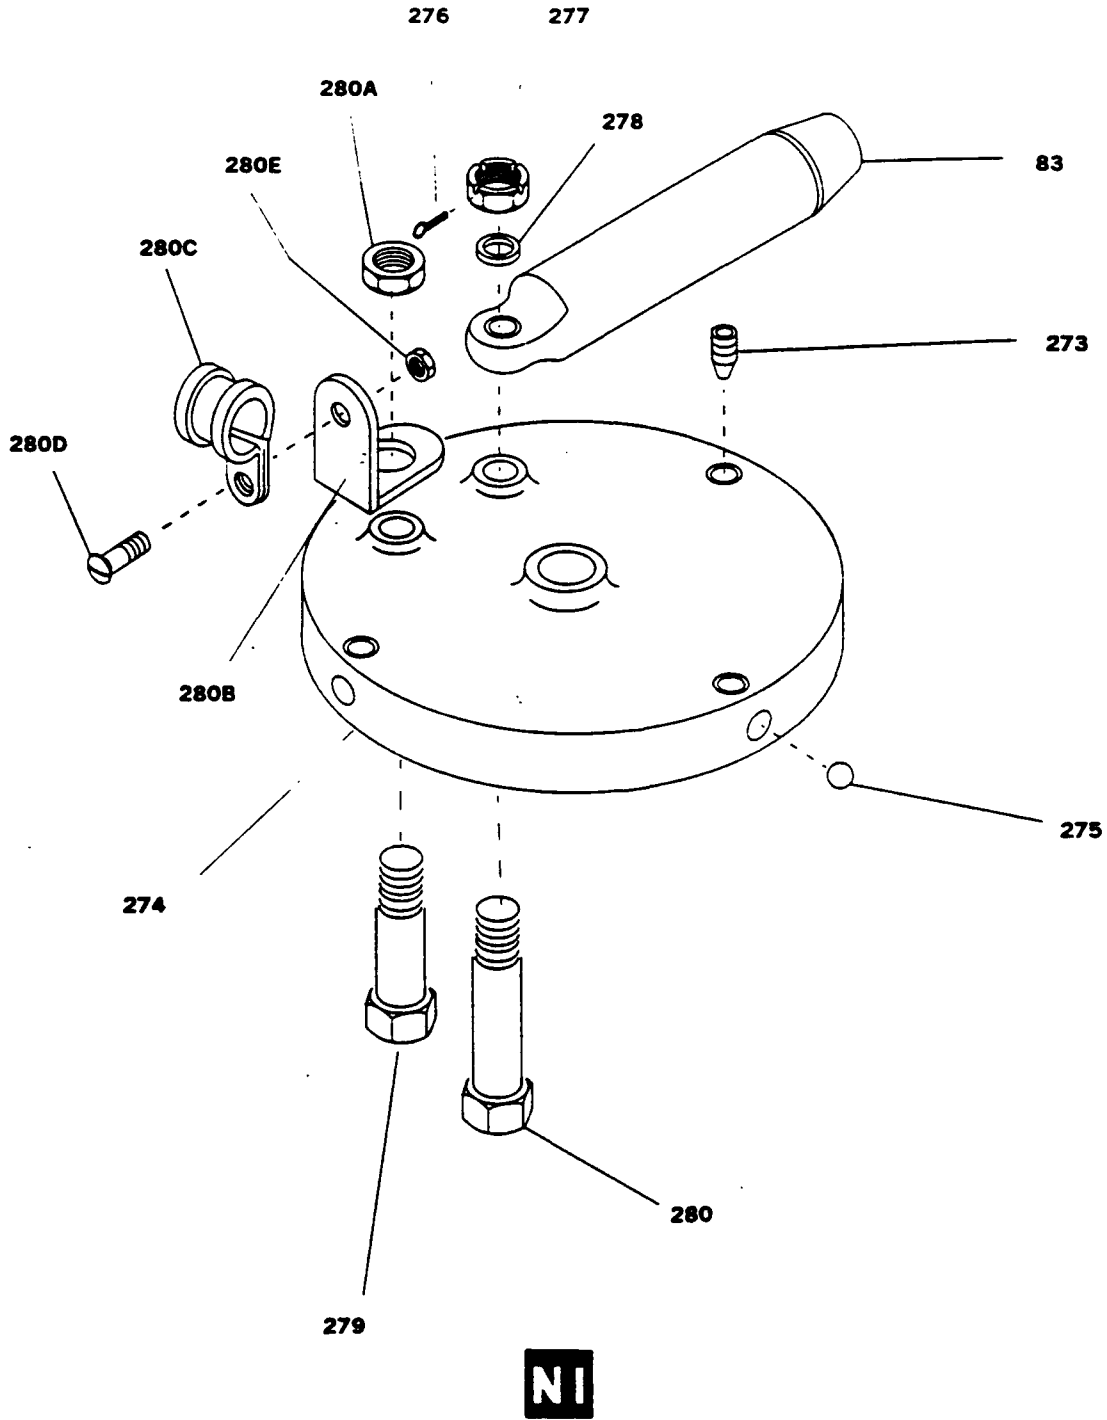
RH Aft Strut Assembly (Sheet 18 of 18)
